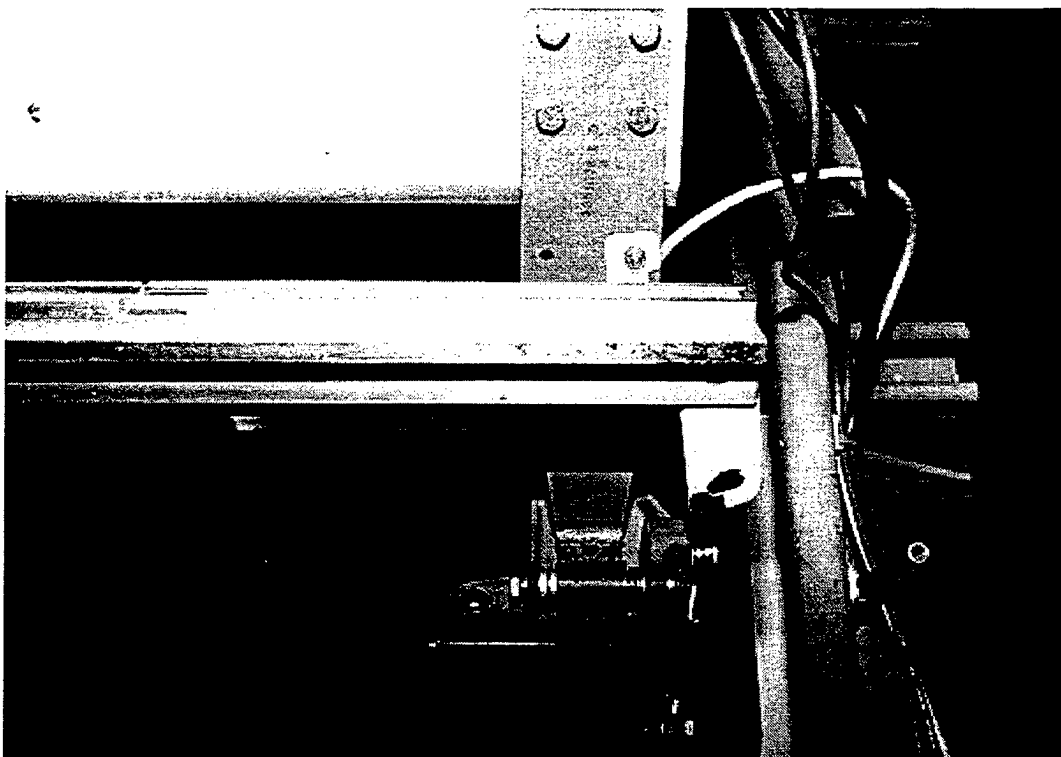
PRETEST BIN A LOWER FRONT SUPPORT BOTTOM VIEW
